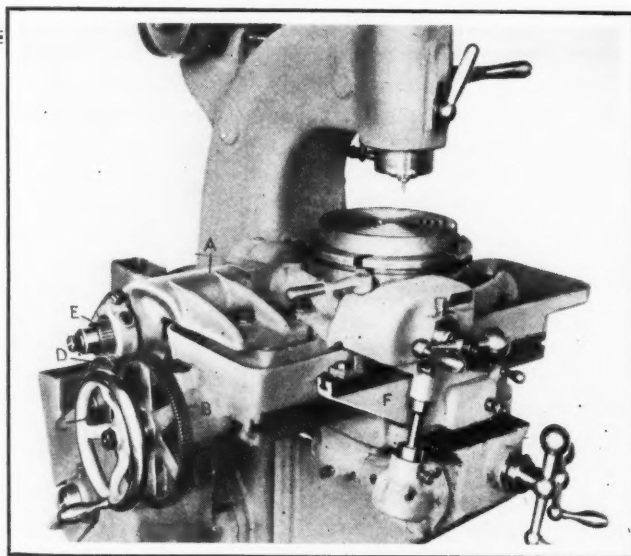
Vertical Milling Machine Arranged for Cutting Spirals in Flat Work
